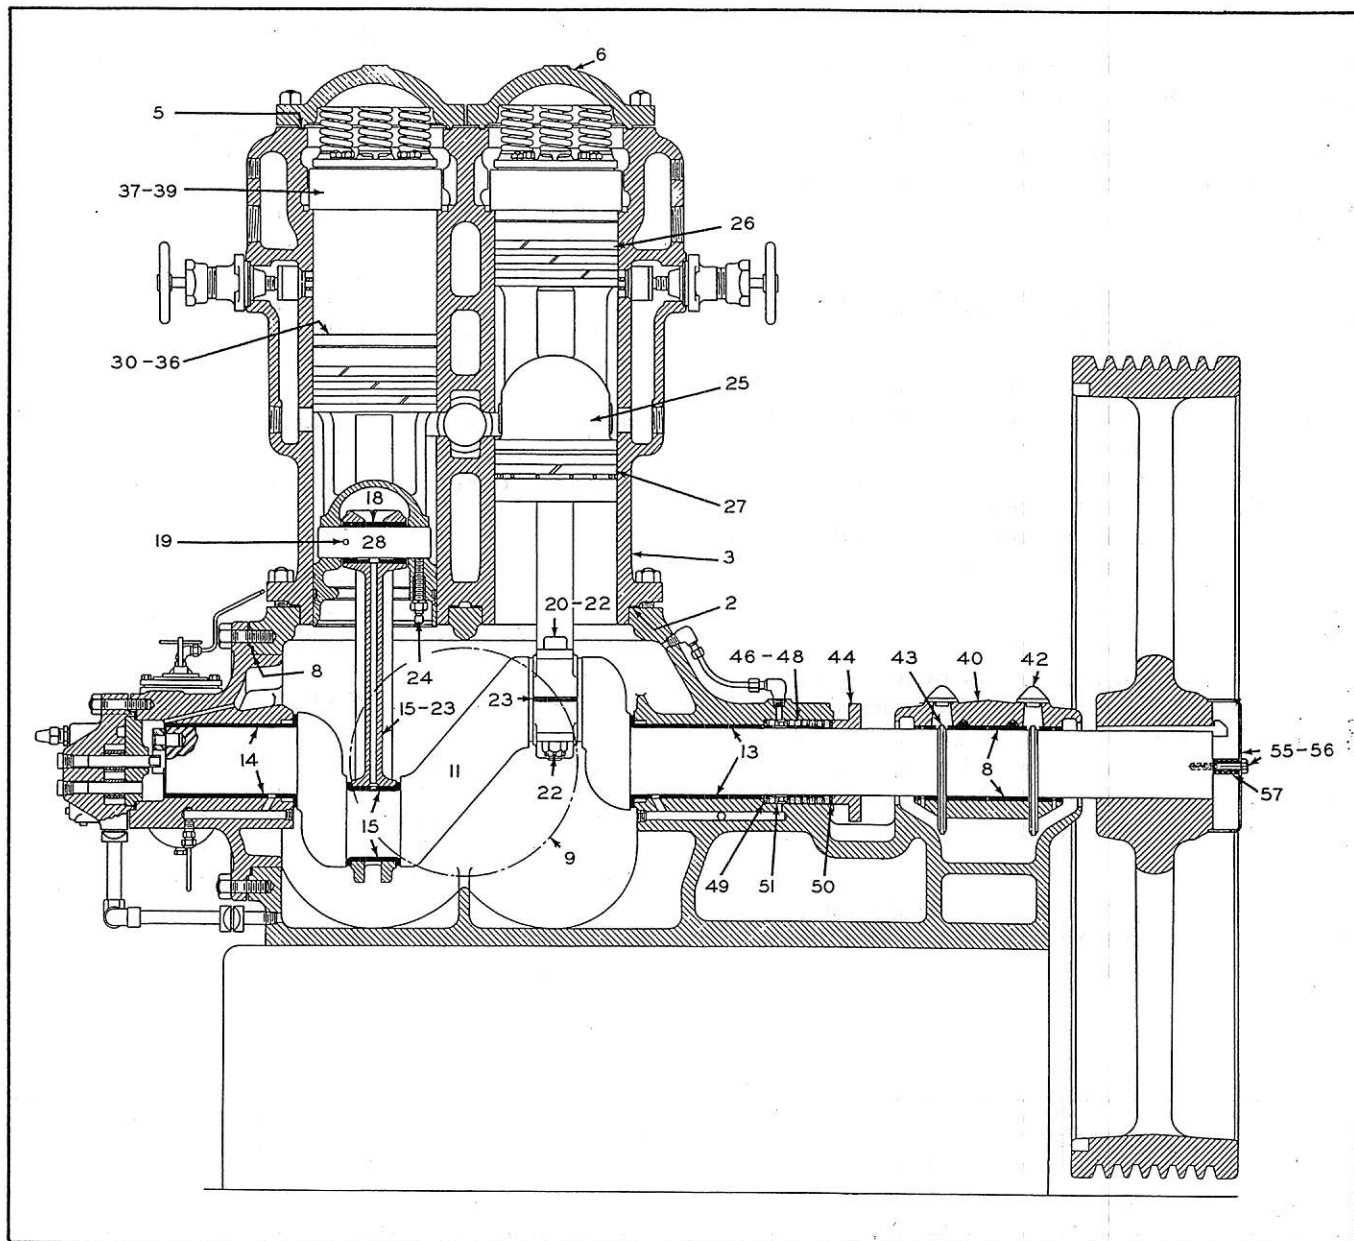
Sectional View, Enclosed, Two Cylinder Compressor
